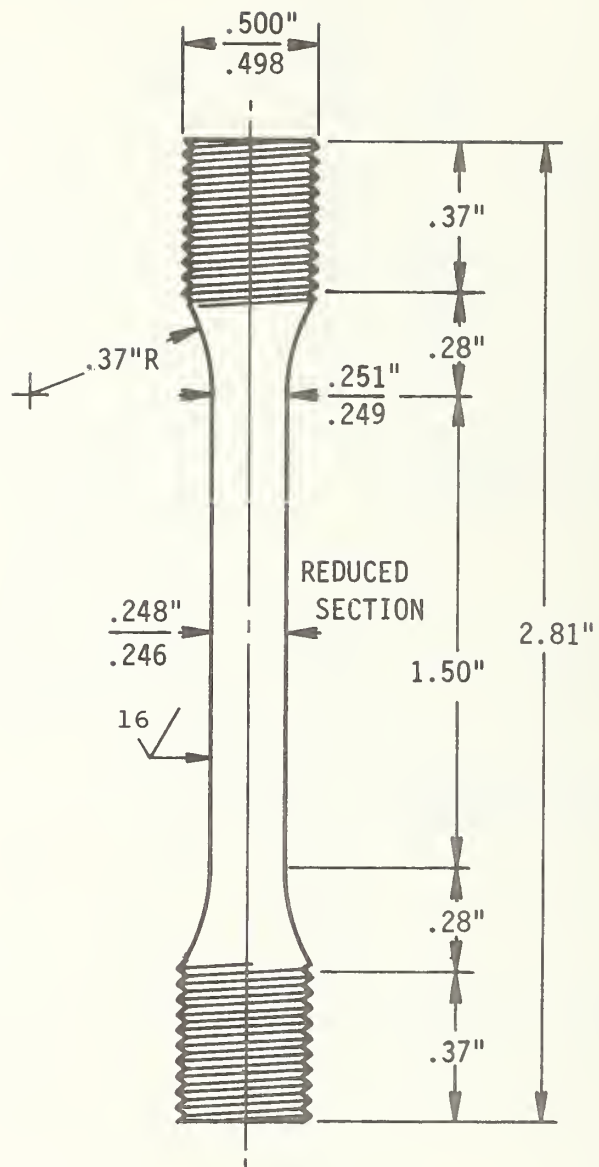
Tensile Specimen (1 in. = 2.54 cm)
